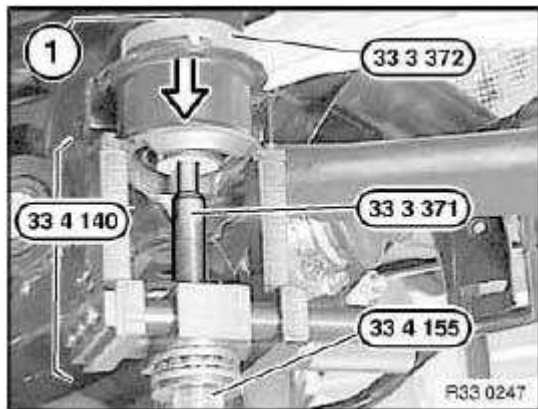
Special Tool (33 4 140), (33 3 372) And (33 3 371)
